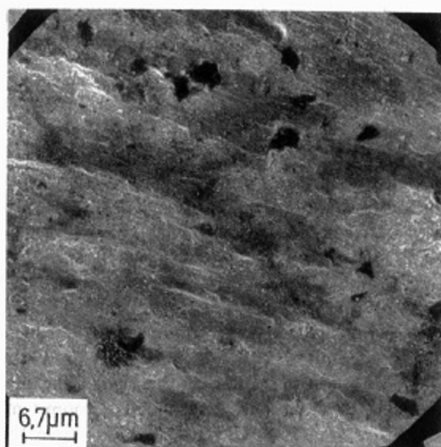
Shear fracture area on the final fracture surface of the broken shaft.
